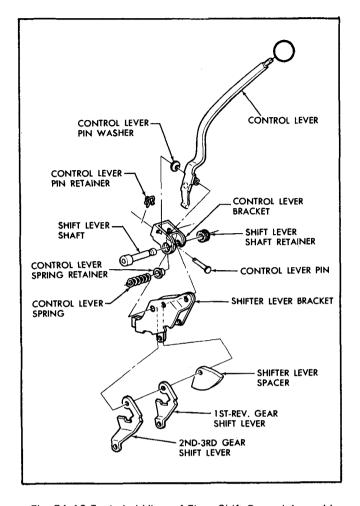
A-16 Exploded View of Floor Shift Control Assembly (X Series)
